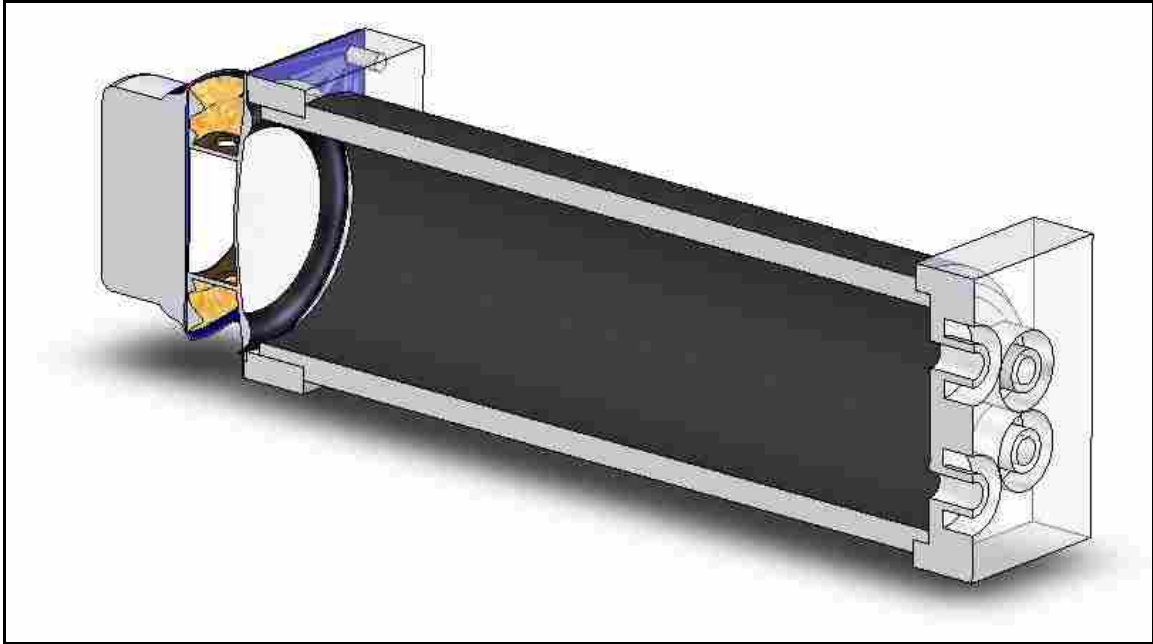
Section view of the CAD assembly drawing of the splitter mounted on the driver tube opposite the driver and coupler
